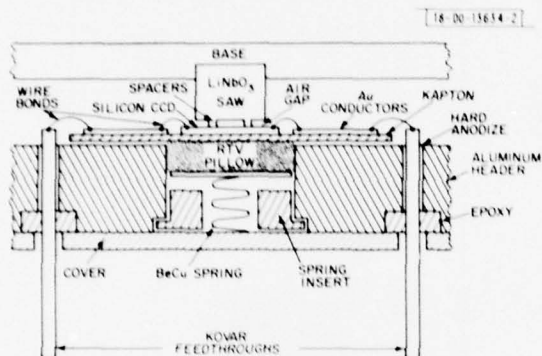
Cross-sectional view of an assembled SAW/CCD buffer memory device. Header is attached to base with machine screws.
